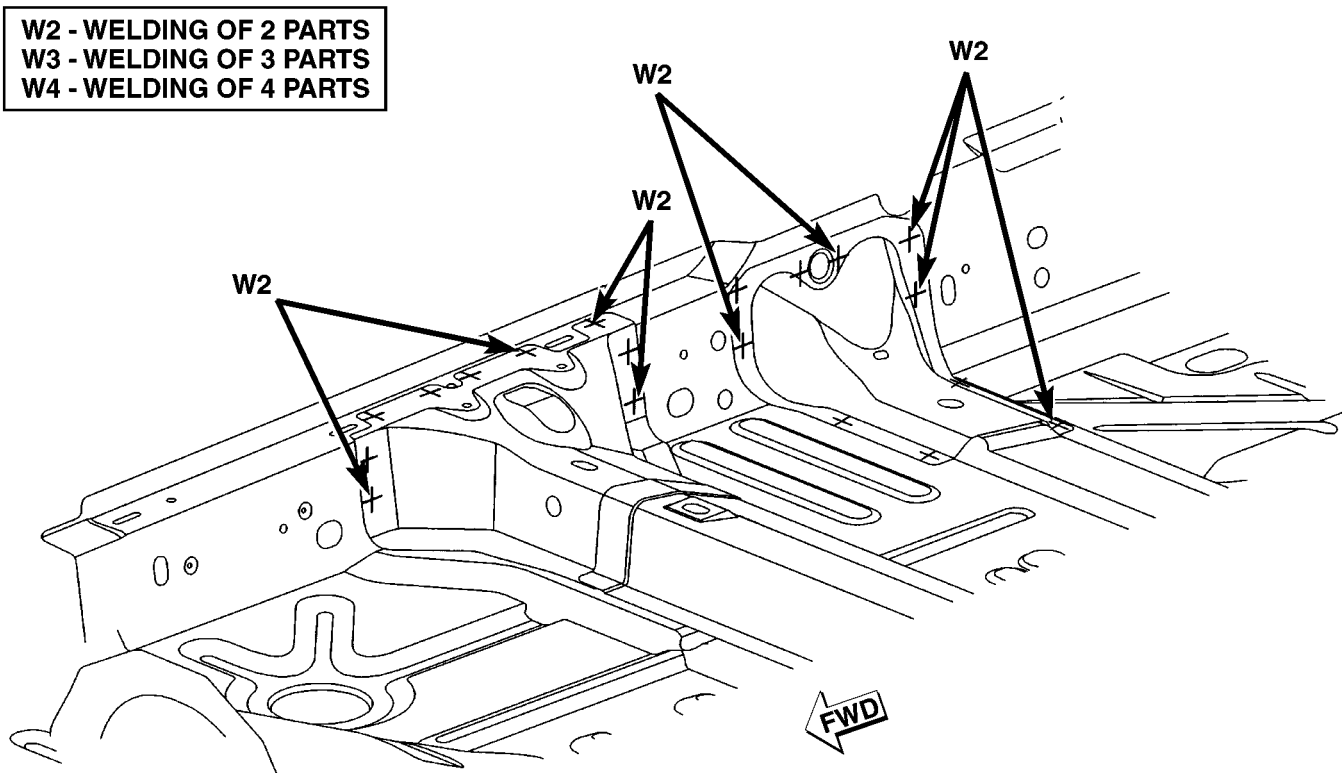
REAR INNER WHEELHOUSE ASSEMBLY
